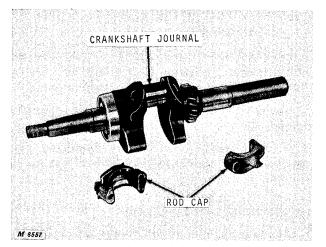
Scored and Galled Crankshaft Journal and Rod Cap Caused by Lack of Lubrication
